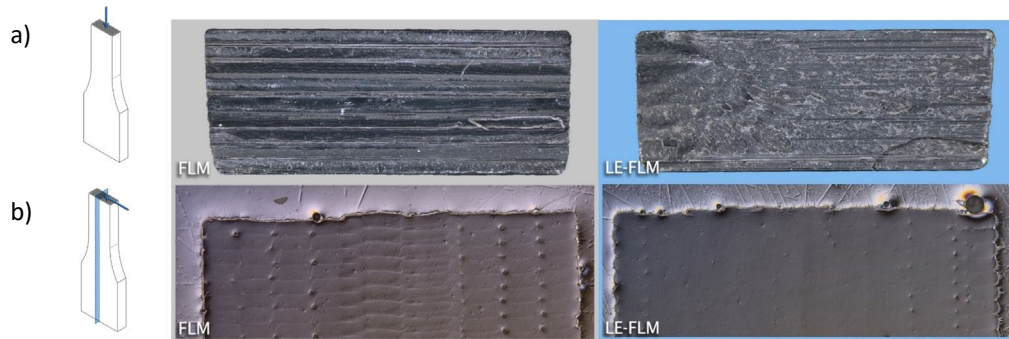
(a) Top view of the fracture surface of vertical printed test specimens for the FLM process and the LE-FLM process (b) cross-section of the fracture surface (upper edge) and internal mesostructure based on a polished sample embedded in epoxy resin shown under polarized light for the conventional FLM process and the LE-FLM process
